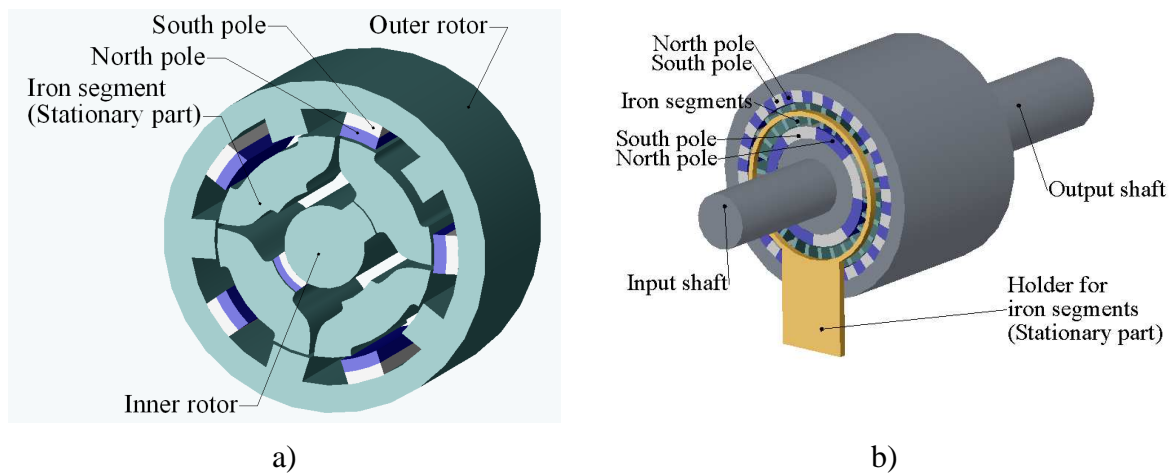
a) Magnetic gear similar to the mechanical planetary gear type [39]. b) High performance magnetic gear [1].
